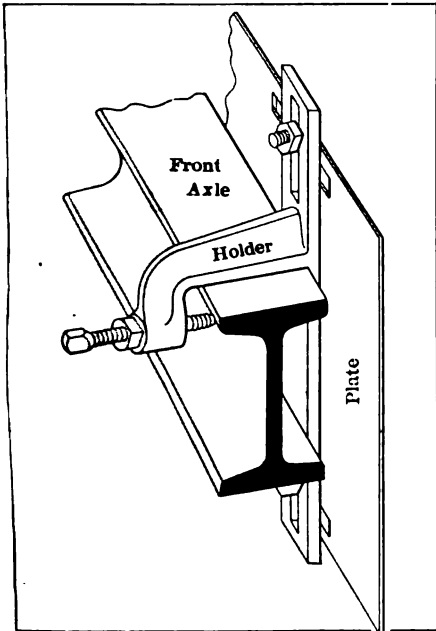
Showing how the Apco plate holder is attached to the front axle
